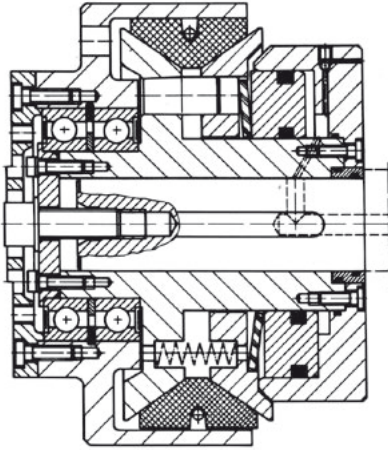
Conax®-Friction clutch type CHFA hydraulically actuated for universal joint
